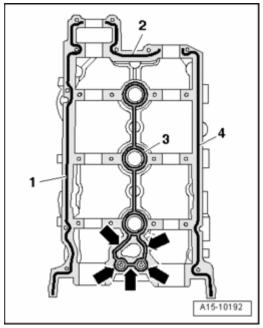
Applying Small Quantity Of Sealant In Seal Groove In Area Of Camshaft Adjuster Solenoid Valve Opening
